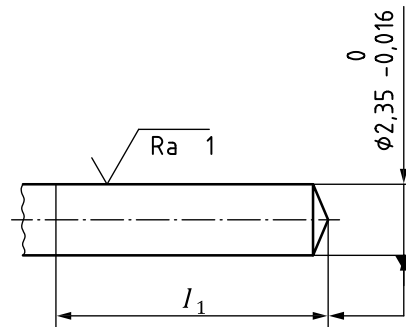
Dimensions, tolerances and surface roughness for Type 2 shank
